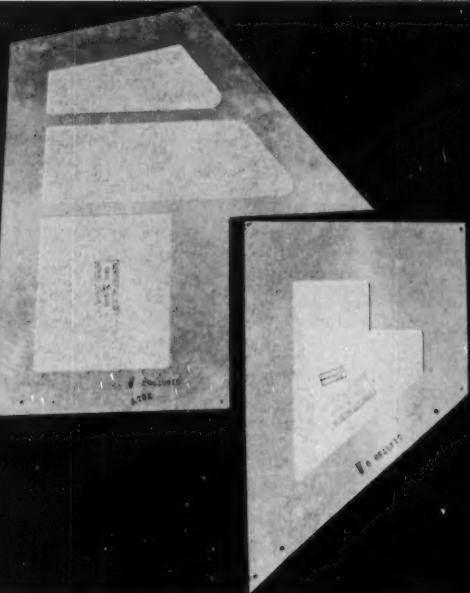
Below—Strip with five small access doors, *a*, is milled as a unit. Parts are later cut and trimmed to size. Wing rib with integral stiffeners, *b*, demonstrates intricate pattern. The step is produced by a double unmasking operation. Part is masked by dipping, then areas to be chemically milled are scribed and the masking removed from area of deepest cut. Scribe marks around unmasked areas are covered with lead tape and part is etched to depth of the step. Remaining scribed area is unmasked and the part is etched to depth of the shallower cut. In this case, the step is 0.020-in., so this amount is removed on first cut. Part is 0.188-in. sheet; shallower cut leaves web thickness of 0.070-in. and deeper cut leaves 0.050-in.
